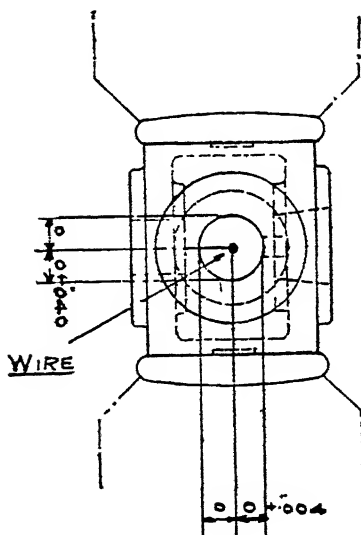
POINT C—TAKEN IN PISTON-ROD BOSS AS ABOVE BUT WITH CROSSHEAD AT REAR END OF SLIDE
